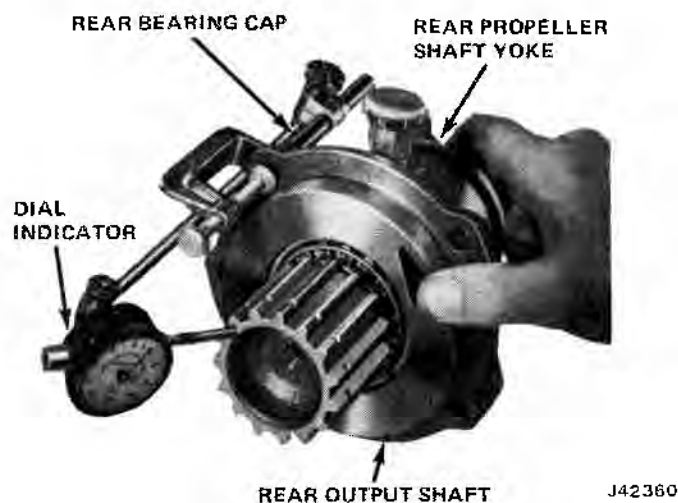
Checking Rear Output Shaft Bearing Adjustment
